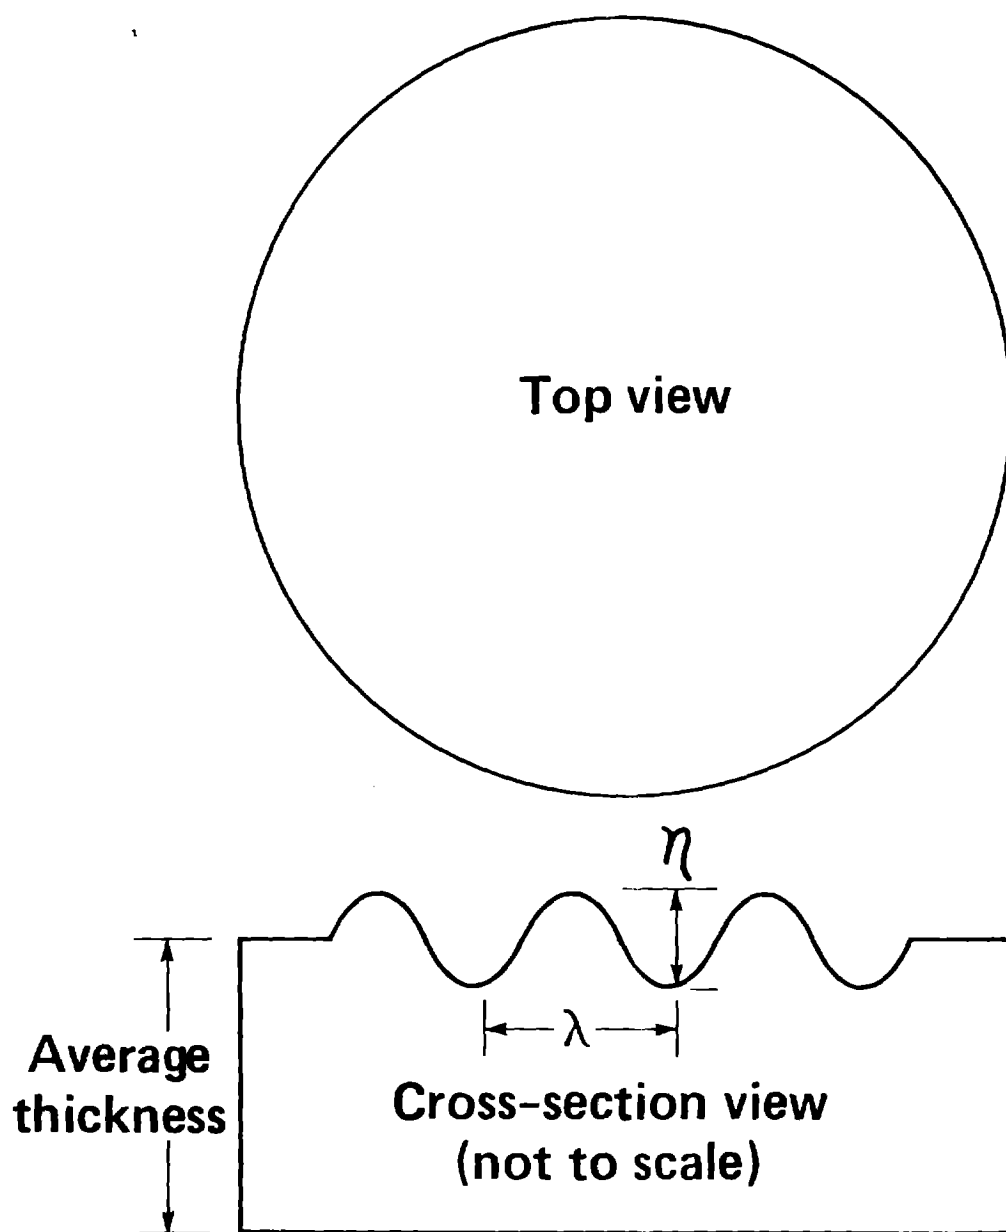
Definition of λ and η for machined-in R-T target defects
